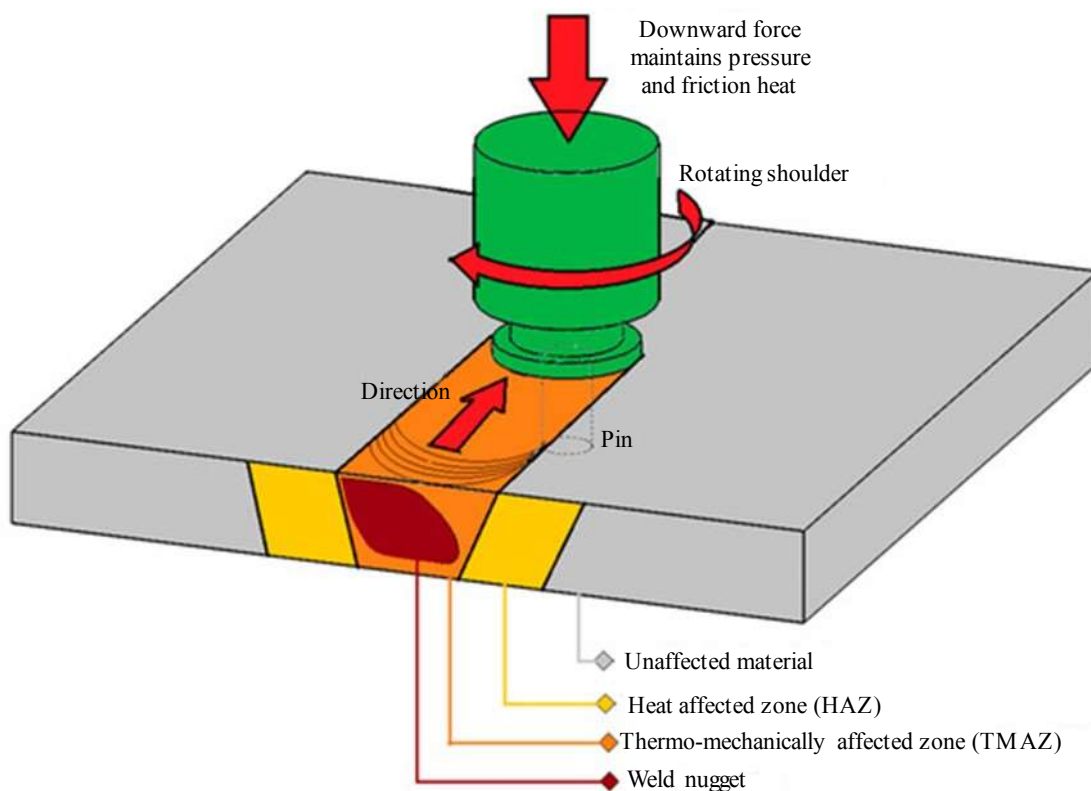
FSW technique generates heat in the work piece using a rotating tool [12].
